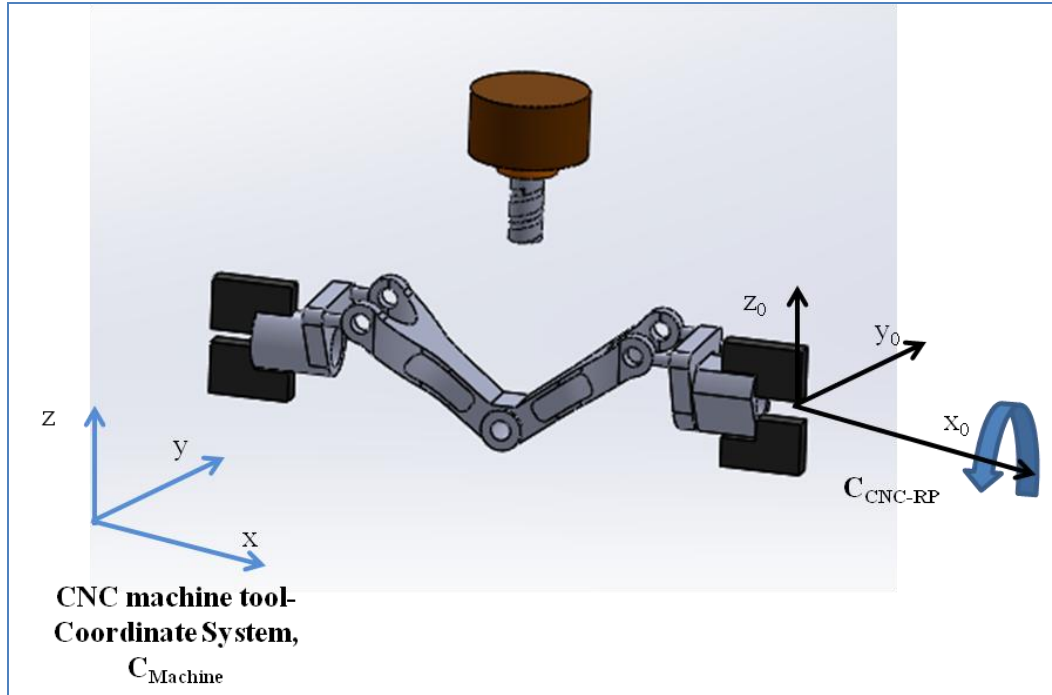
CNC-Machine Tool and CNC-RP Coordinate System
